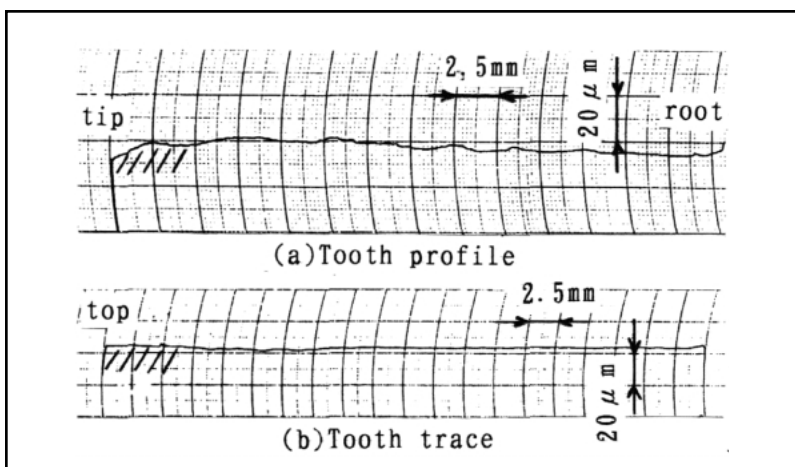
Tooth profile and tooth trace after 10 gears finished with CBN-tipped hob (150 meters per minute).
